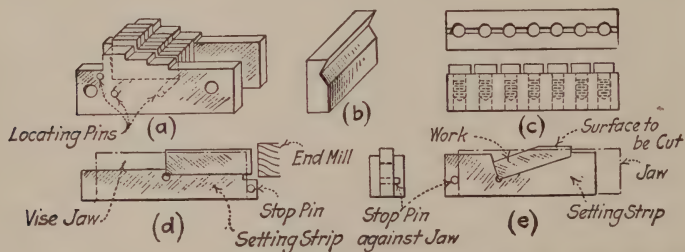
Sketches to show the use of special jaws and setting strips: (a) several thin pieces in special jaws; (b) special jaw for holding a cylindrical piece; (c) "false" jaws for slotting screws; (d) and (e) setting strips.
